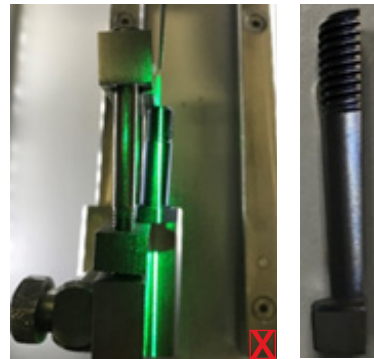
Illustrates sectioning challenges attributed to clamping on a precision sectioning machine
